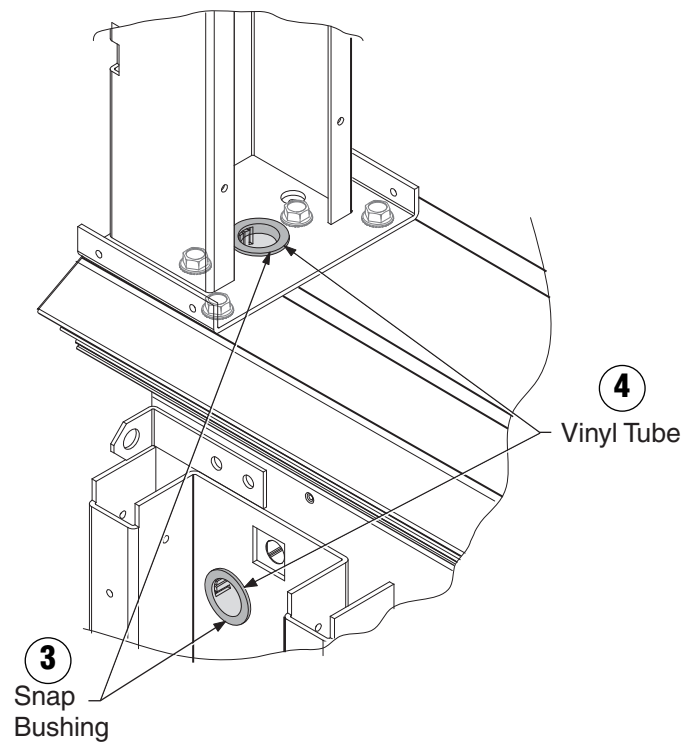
Snap Bushings and Vinyl Sleeve Tube
